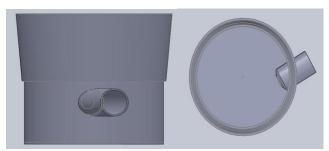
Air Inlet Pipe 30° Inclined Vertically with Nozzle-Cooling Tower Model
